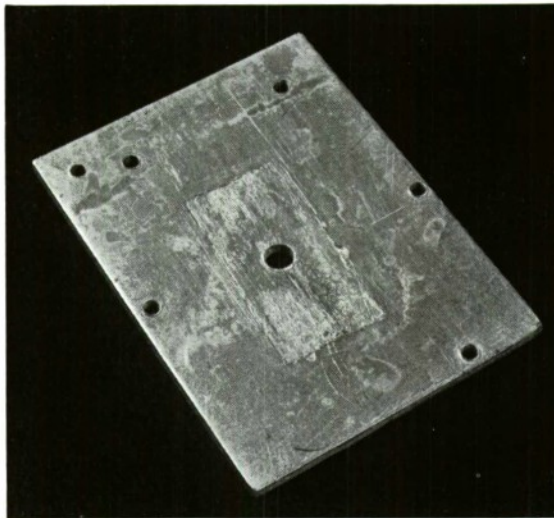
Painted L16 specimen after exposure to salt fog for 87 days. (CFRP-L 16 couple; bolted, dry assembled; paint stripped and metal cleaned.)
